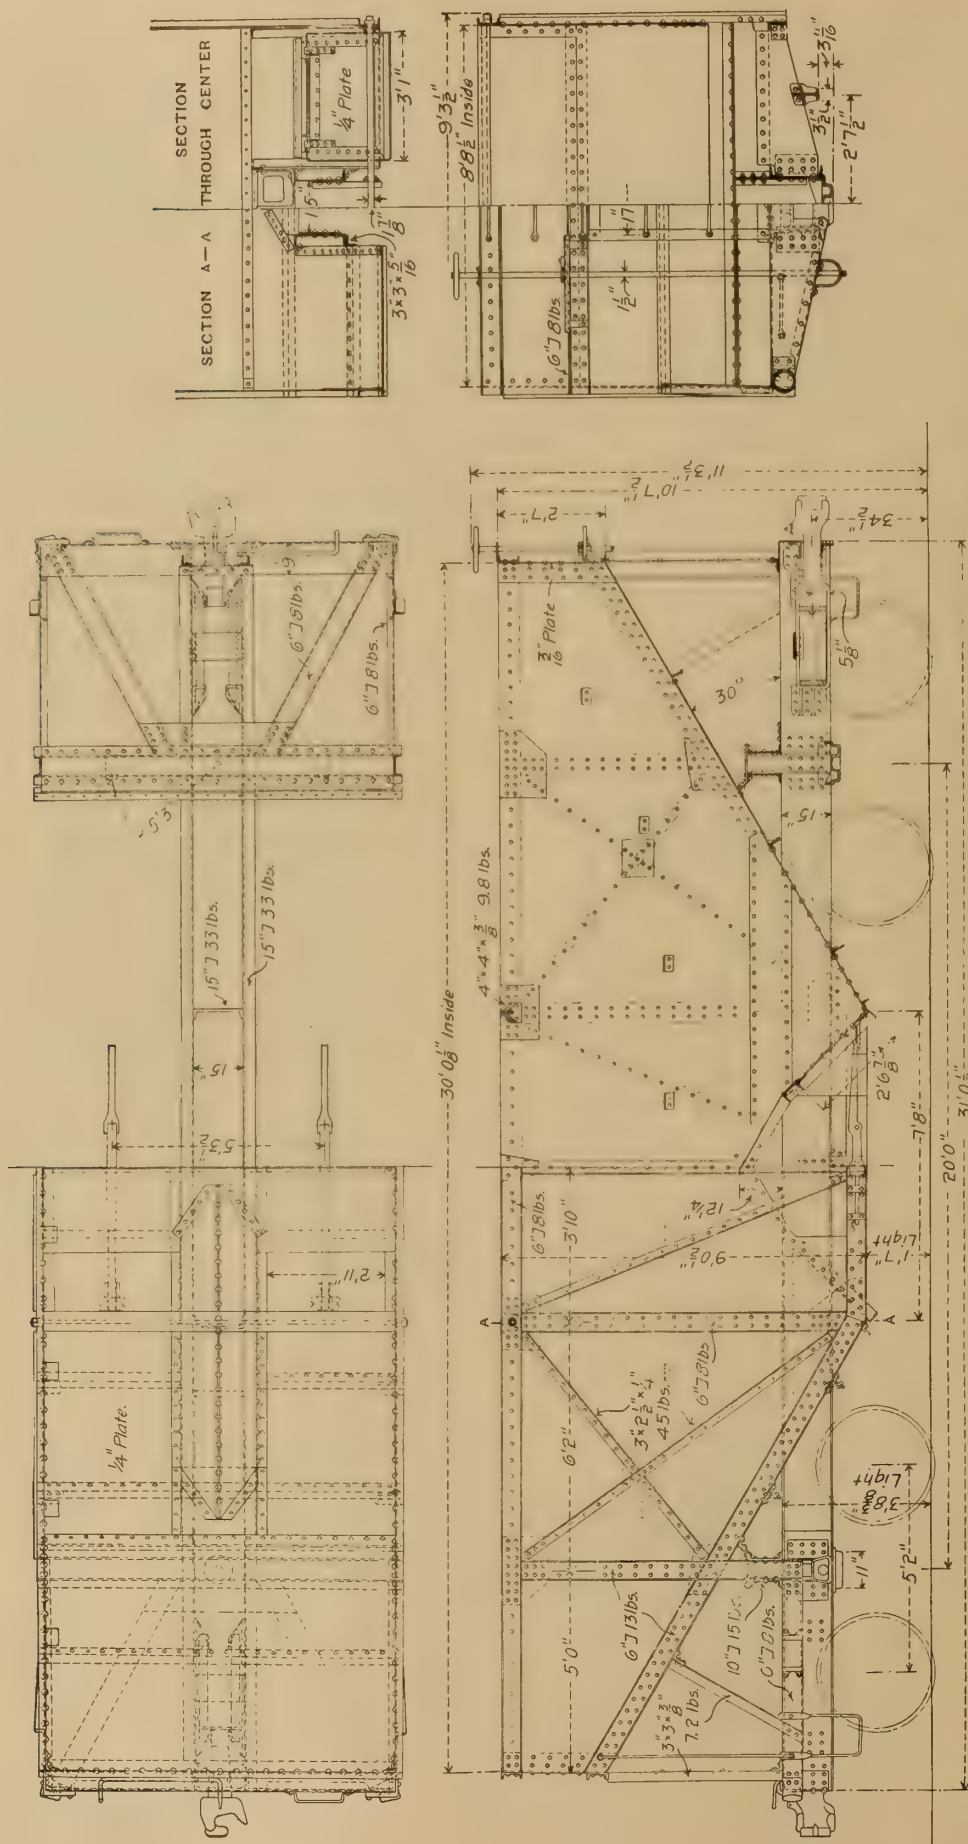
PLAN OF FRAMING OF 31-FT. HOPPER CAR WITH STRUCTURAL STEEL UNDERFRAME, N. & W.
